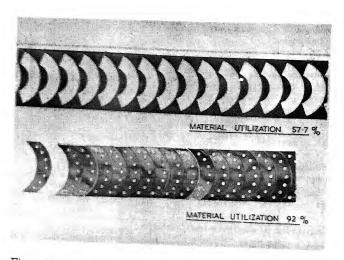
Design modification of a rotor segment. It is not always imperative to adhere to the concentric circles convention in design. (Courtesy of Hoover, Ltd, England)
